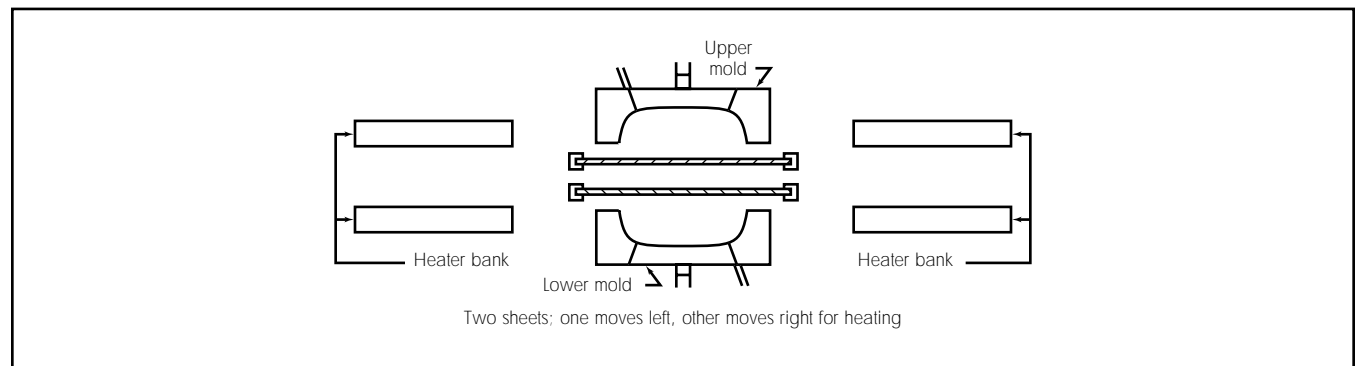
Double-ended ovens on a single-station forming machine.
